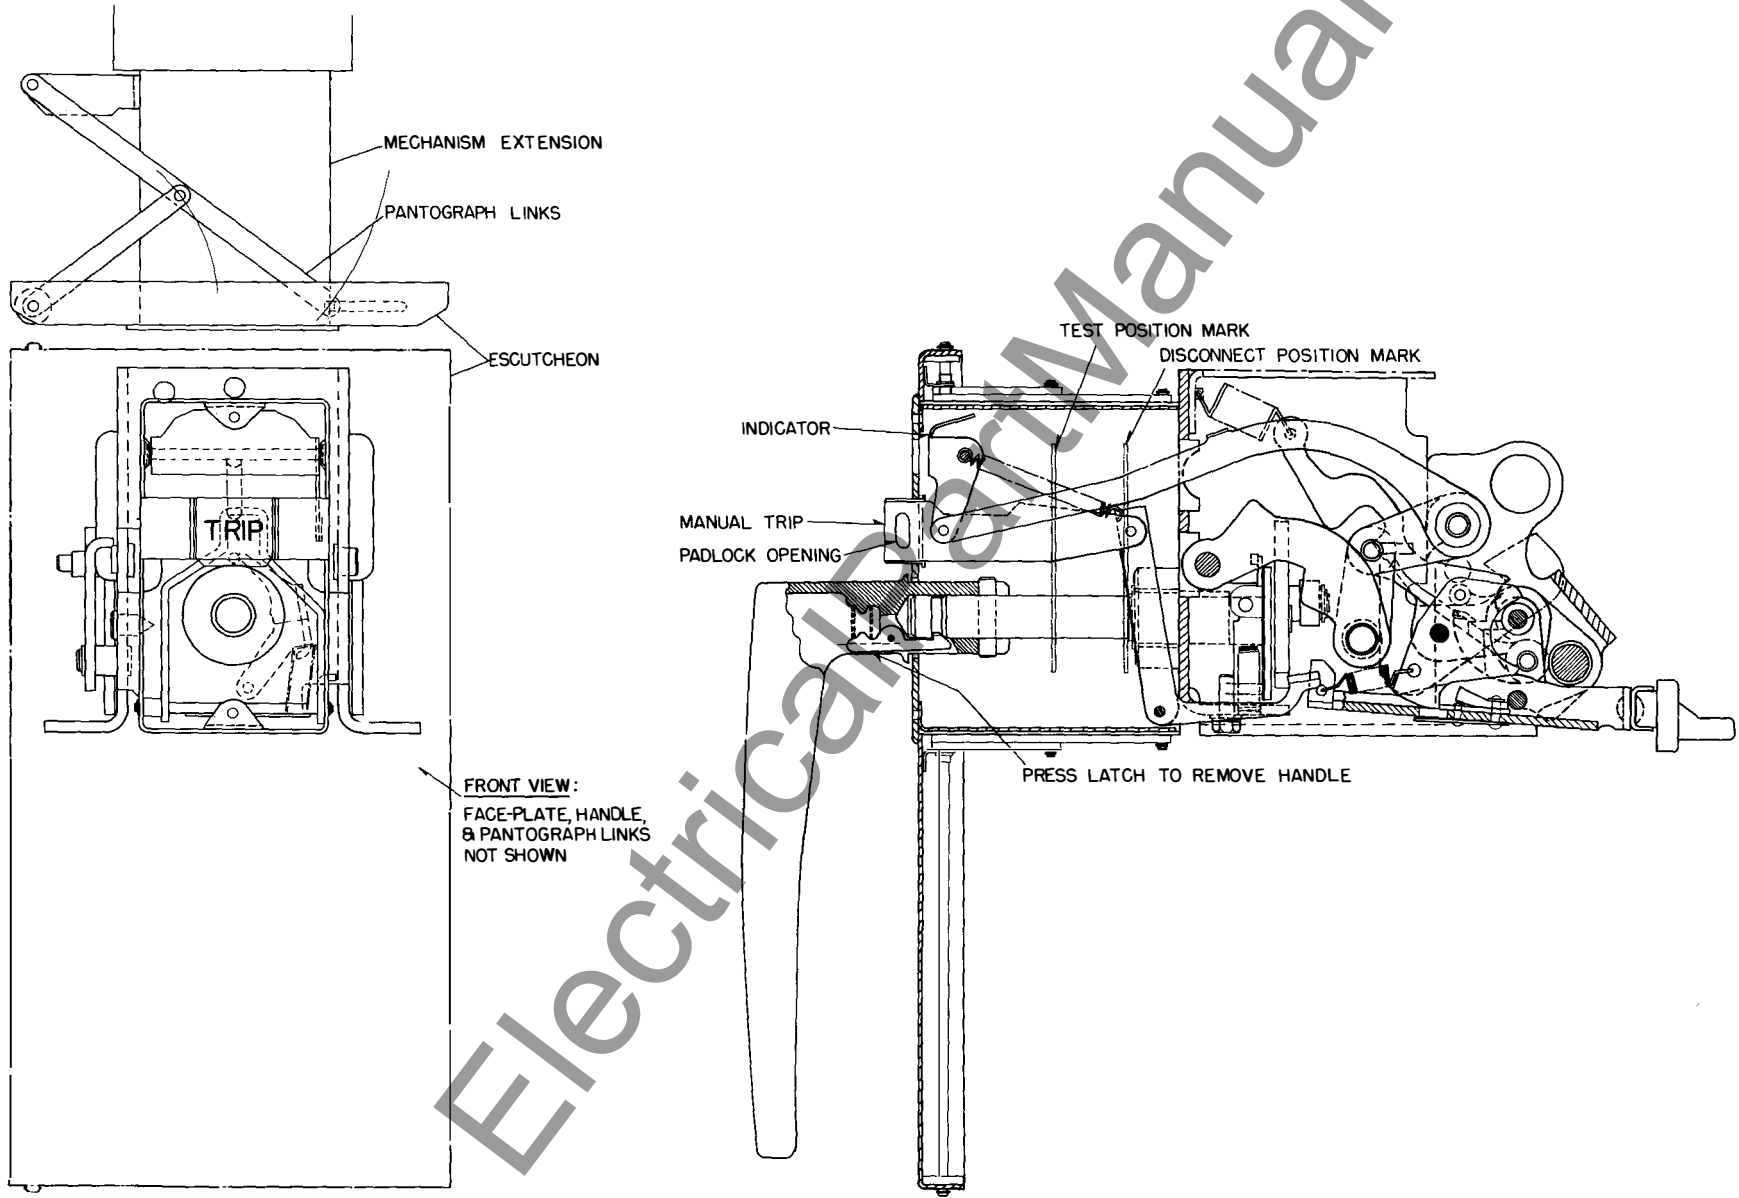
Type DB-50 Three Position Operating Mechanism.
